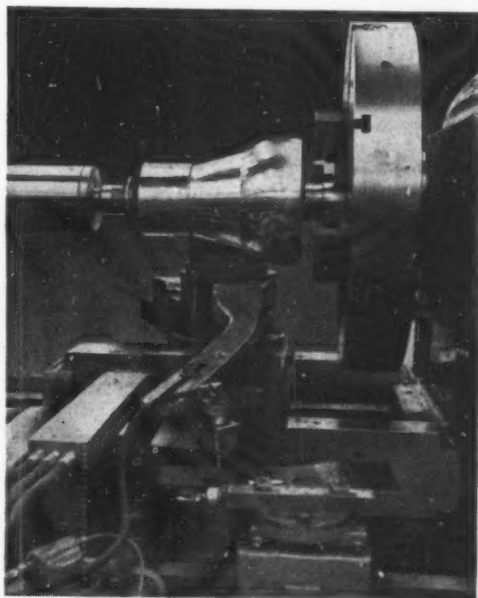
Set-up for turning a rocket nozzle accurately to the required contour on an engine lathe with an air-gauge tracer
